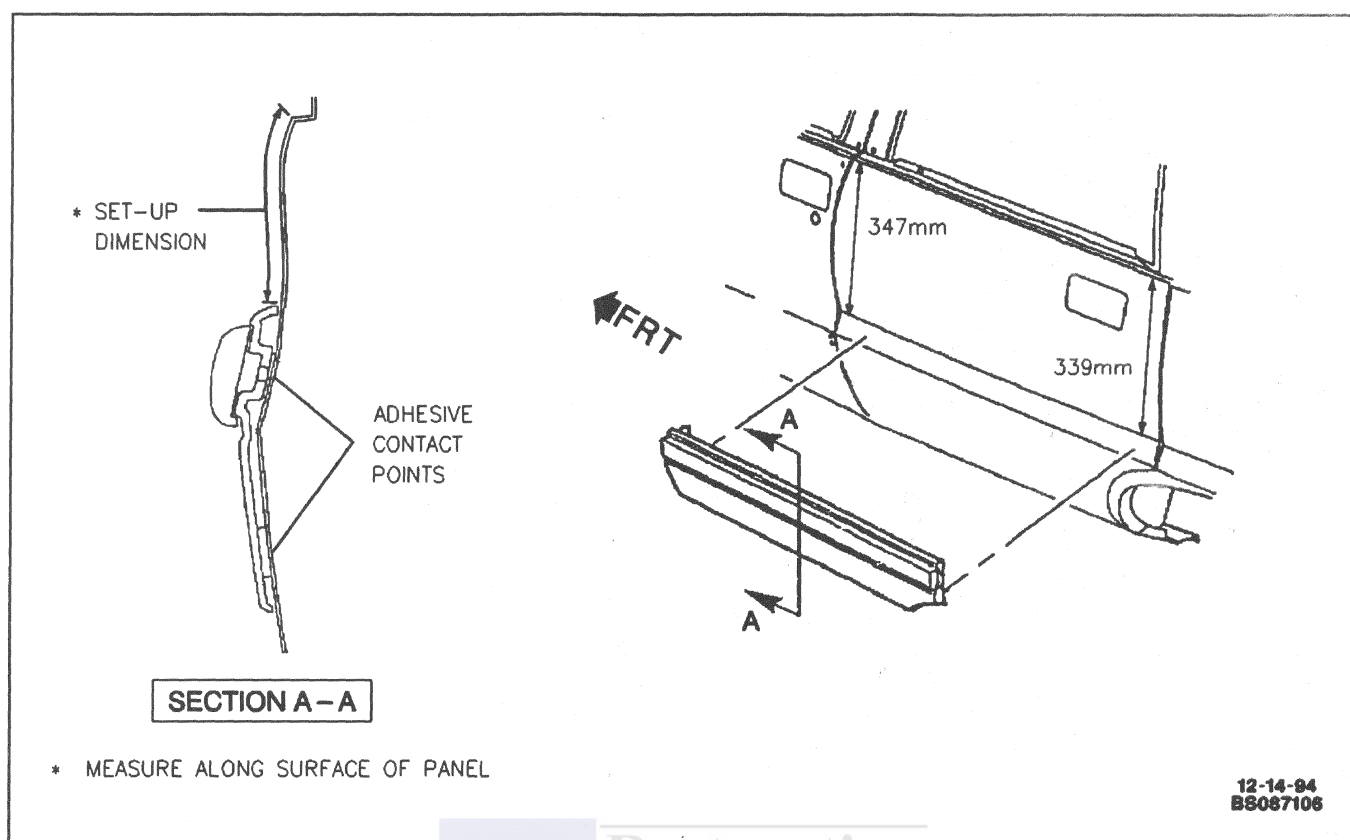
Rear Side Door Center Molding-(Buick Sedan)
